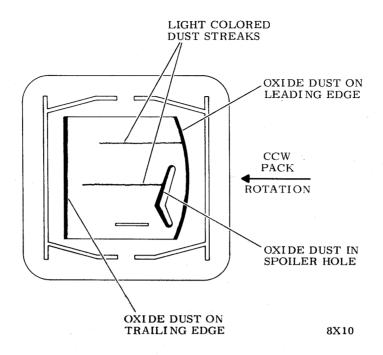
Typical Formation of Oxide Particles on Head Pad
